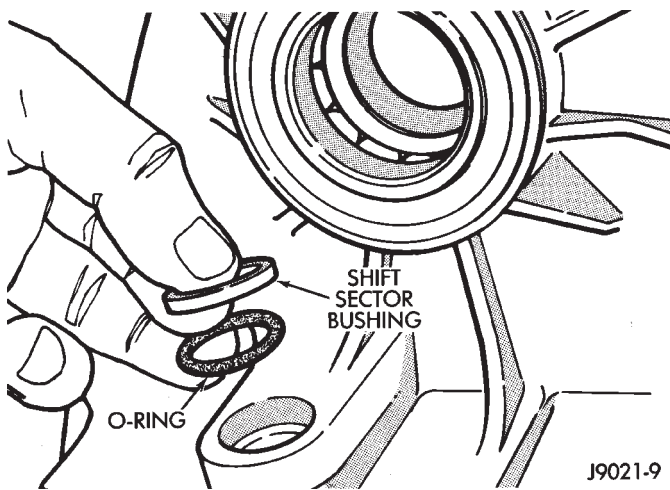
Removing/Installing Sector Shaft Bushing And O-Ring
